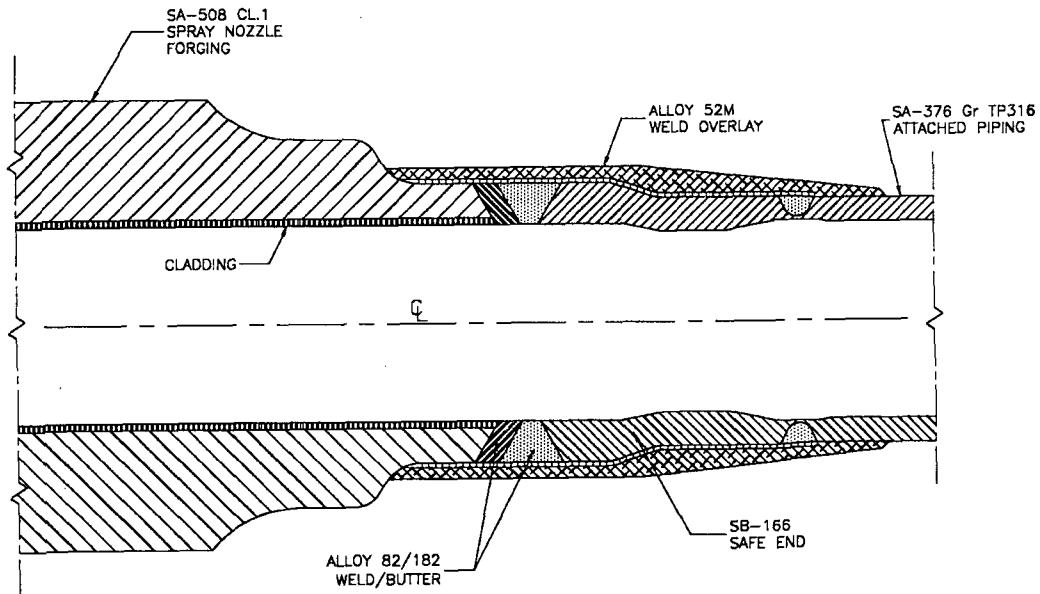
Pressurizer Spray Nozzle Weld Overlay
